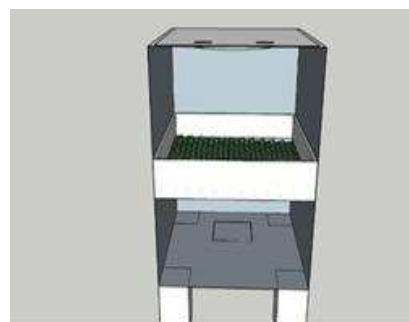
Design of Corn Seed Dryer Using Heating Element with ESP-32 Cam
